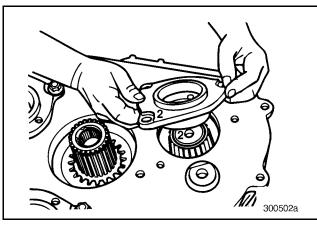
No. 2 Front Countershaft Rear Bearing Cover Removed
